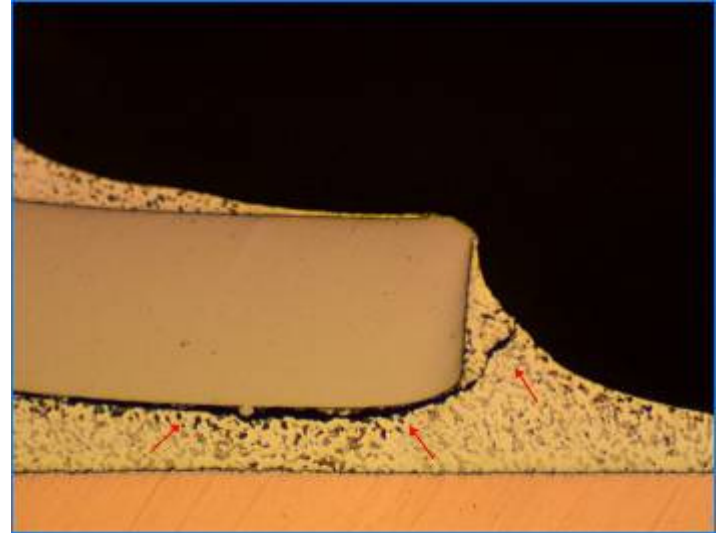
cross section, SN67, U61, right lead solder crack, 200xa
